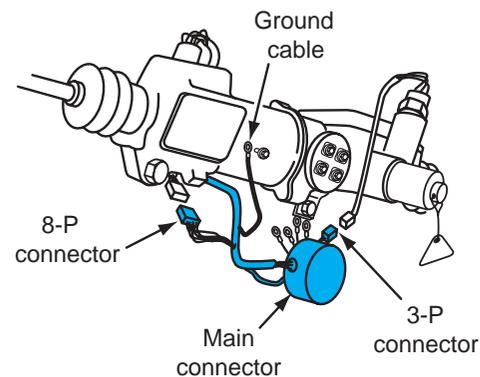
Removing the ground cable connector and all wiring harness connectors on the rear steering actuator.
